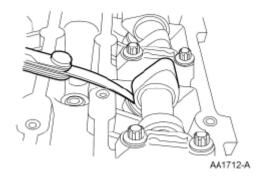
Measuring Clearance Of Valve Courtesy of FORD MOTOR CO.
